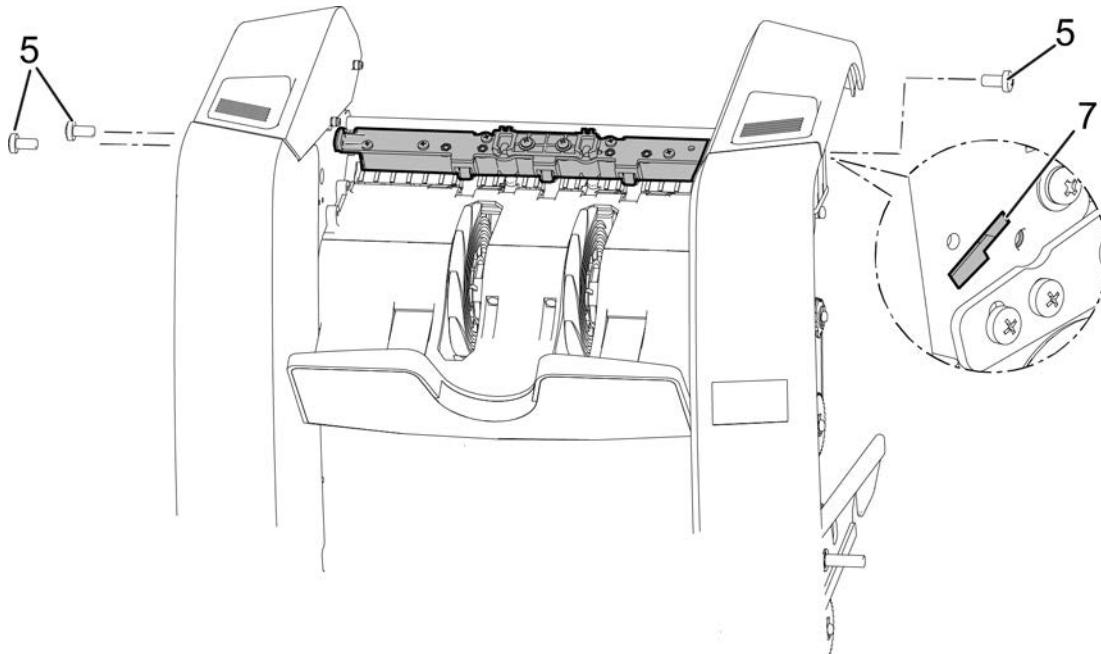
Guide Roller Assembly Removal (3R 16 MM)
